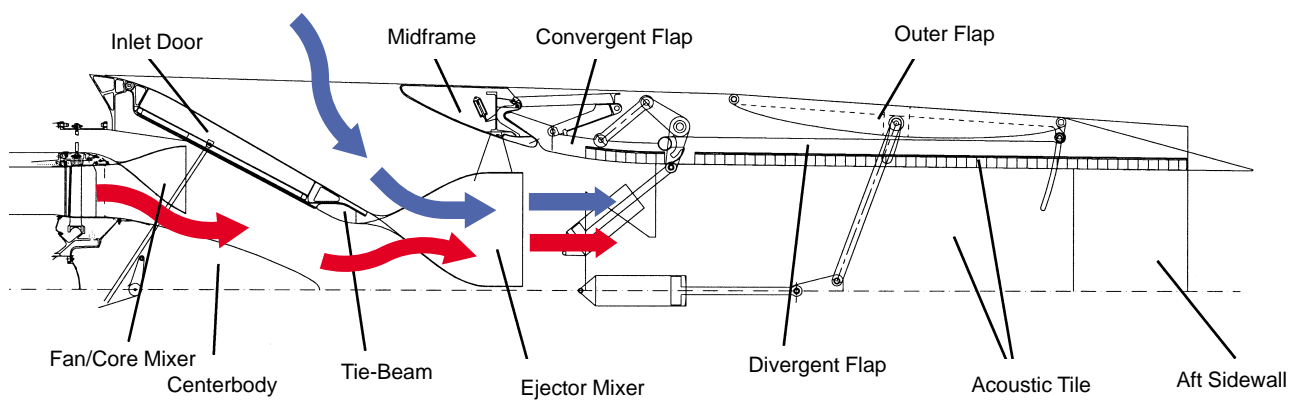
Fan/Core Mixer Side View (Buttline Cross Section)
